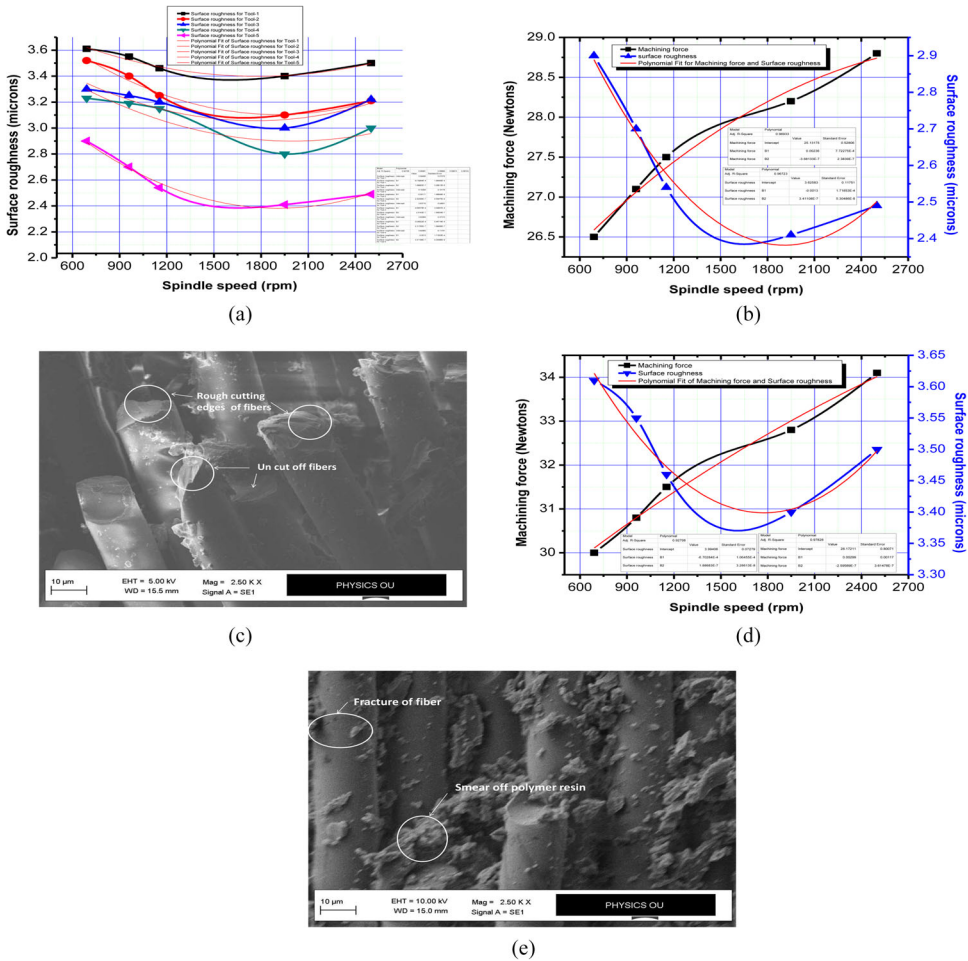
(a) Spindle speed versus roughness with five tools. (b) The interaction effect of machining force and surface roughness at five spindle speeds with tool-5. (c) SEM image for machined surface damages of GFRP laminate, when milling with tool-1 at a spindle speed of 960 rpm. (d) The interaction effect of machining force and surface roughness at five spindle speeds with tool-1. (e) SEM image for machined surface damages of GFRP laminate, when milling with tool-1 at a spindle speed of 2500 rpm.
